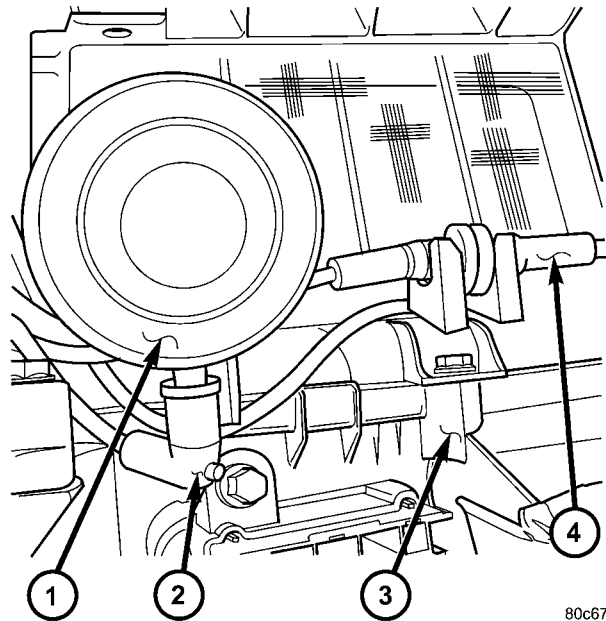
RECIRCULATION ACTUATOR AND CHECK VALVE
